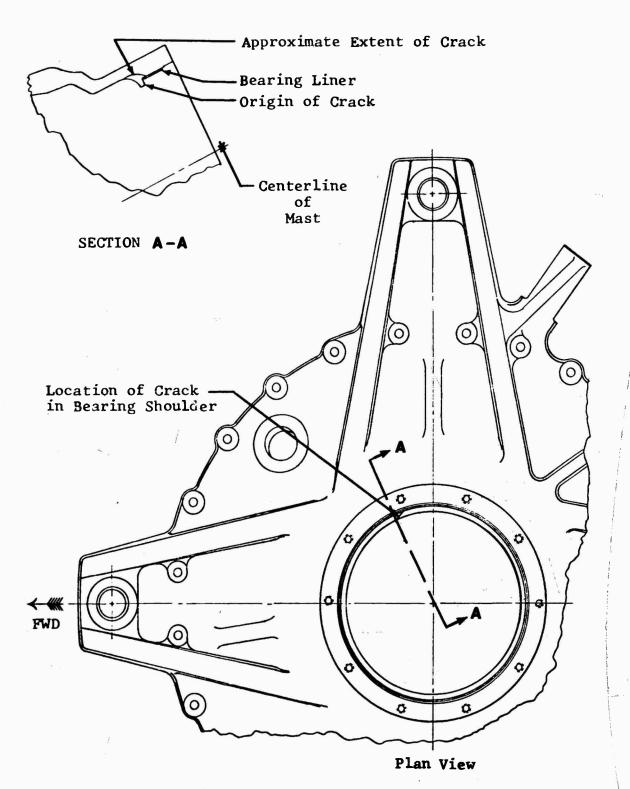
Support Assembly, Vertol Forward Transmission (P/N 114D1088).
